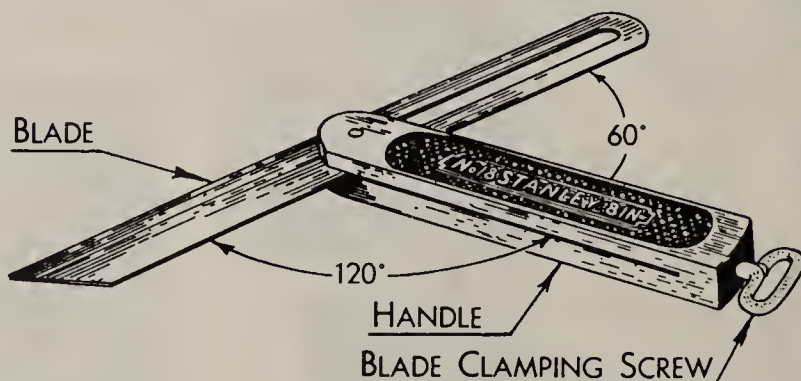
Sliding "T" bevel. A tool of this type is used in marking and testing angles.
